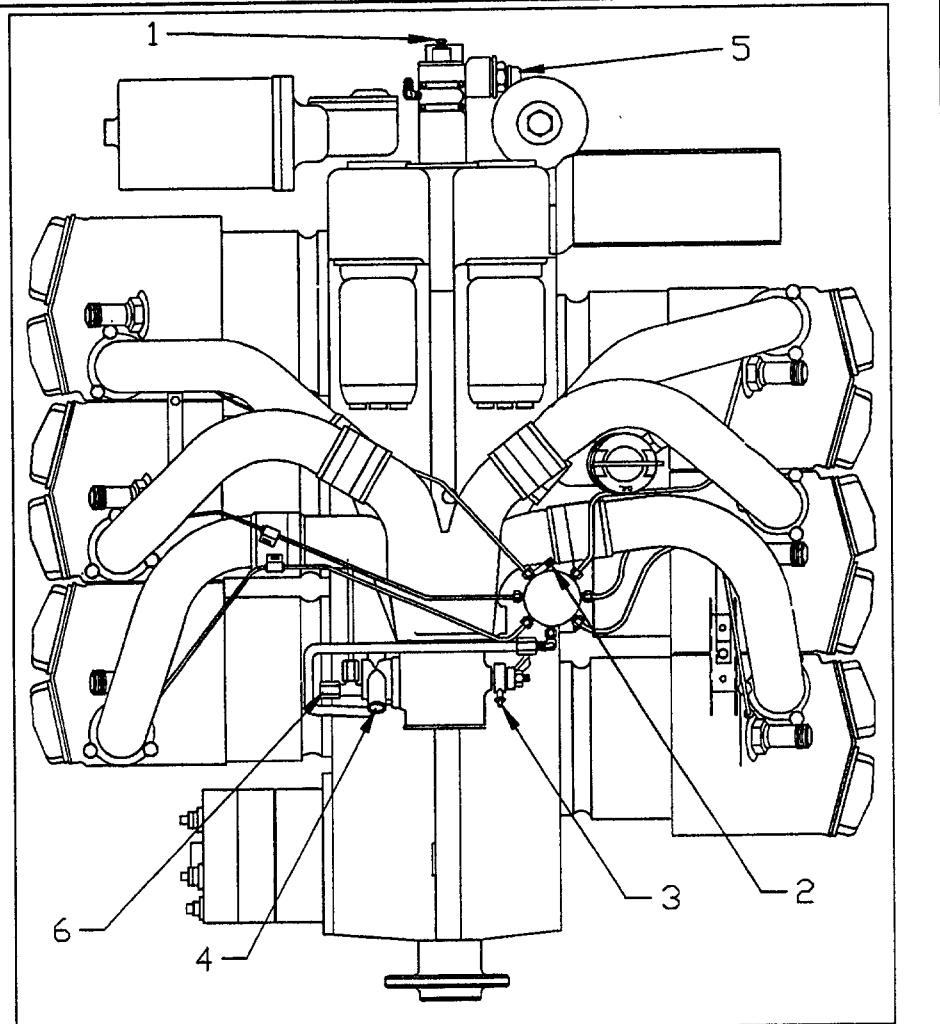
ENGINE SET-UP AND ADJUSTMENT POINTS
